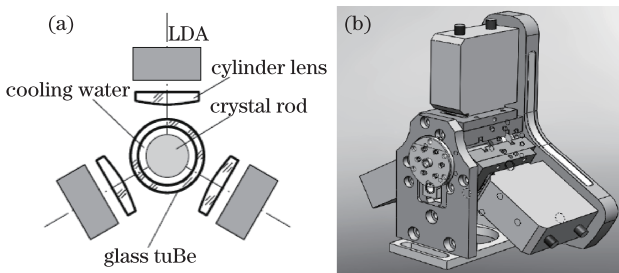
Water-cooled laser head assembly. (a) Schematic diagram; (b) assembly drawing.
